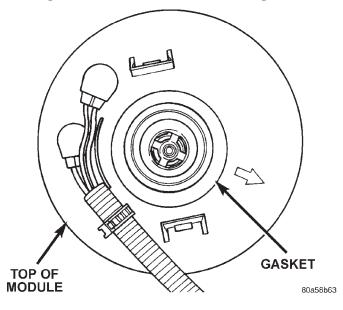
Fuel Filter/Fuel Pressure Regulator Gasket
